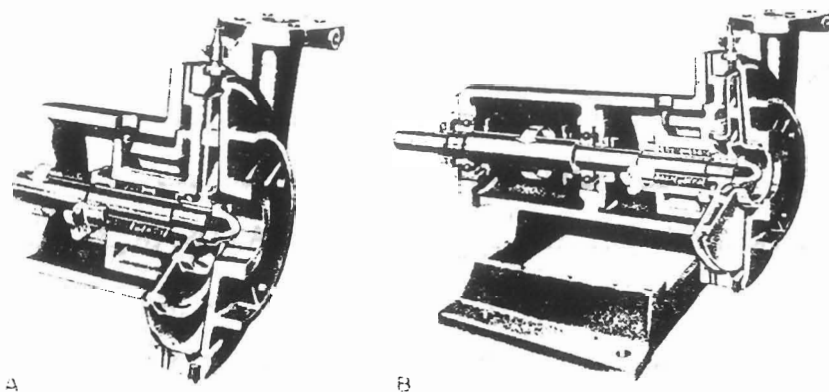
Chemical pumps. (A) Semiopen impeller (B) Closed impeller. (From Pump Division, EMC Corp.)
